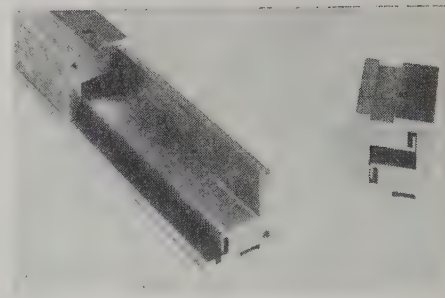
Experimental test sections of serrated choke machined from aluminum castings.
